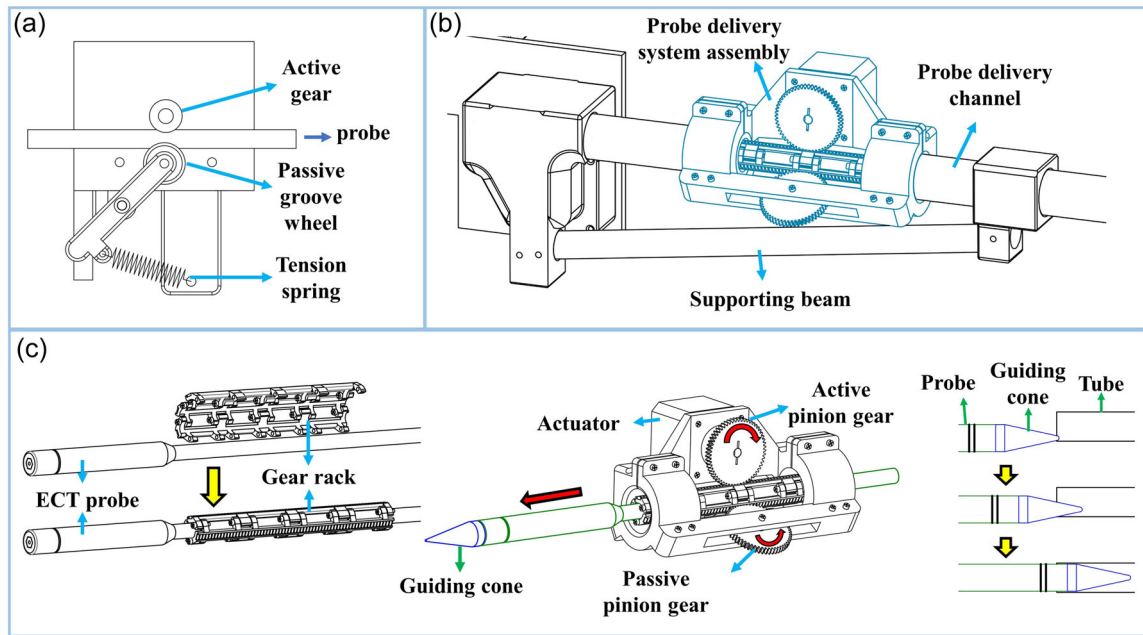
A probe delivery system. (a) CAD drawing of an initial design of a probe delivery mechanism. (b) CAD drawing of improved design of a probe delivery system. (c) CAD drawing of rack assembly and schematic showing probe delivery principle. CAD, computer-aided design.
